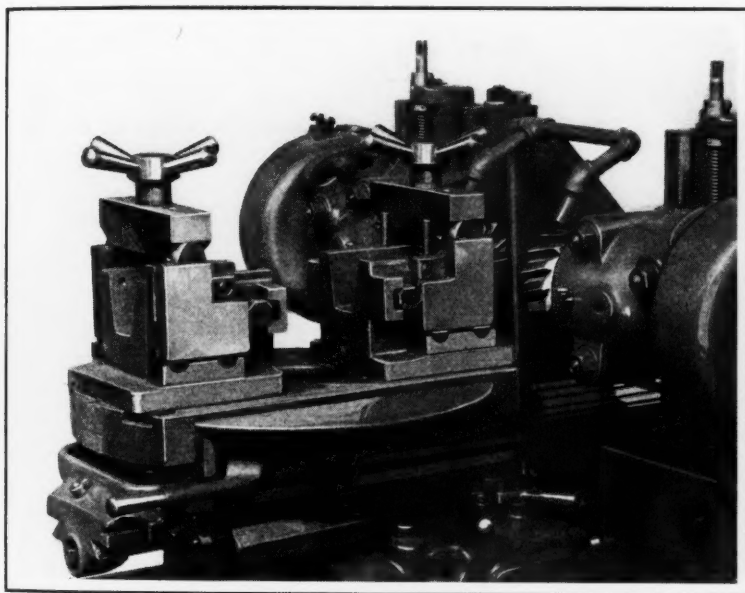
Duplex Milling Machine, Index Base, and Fixtures for Milling Toggle Bases at the Rate of 73 Pieces per Hour
